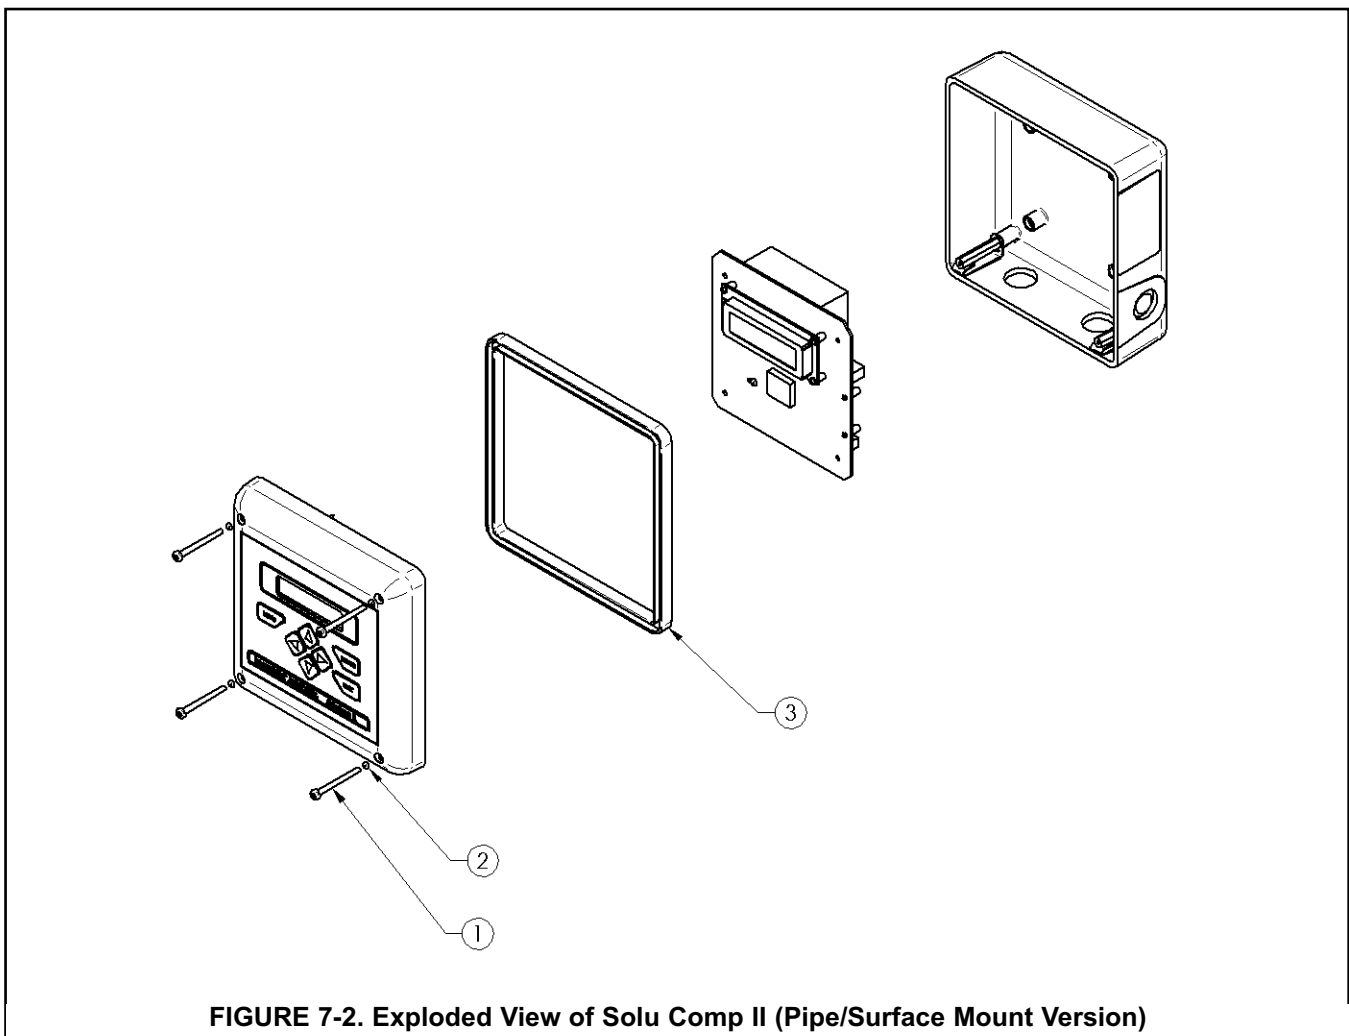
Exploded View of Solu Comp II (Pipe/Surface Mount Version)
